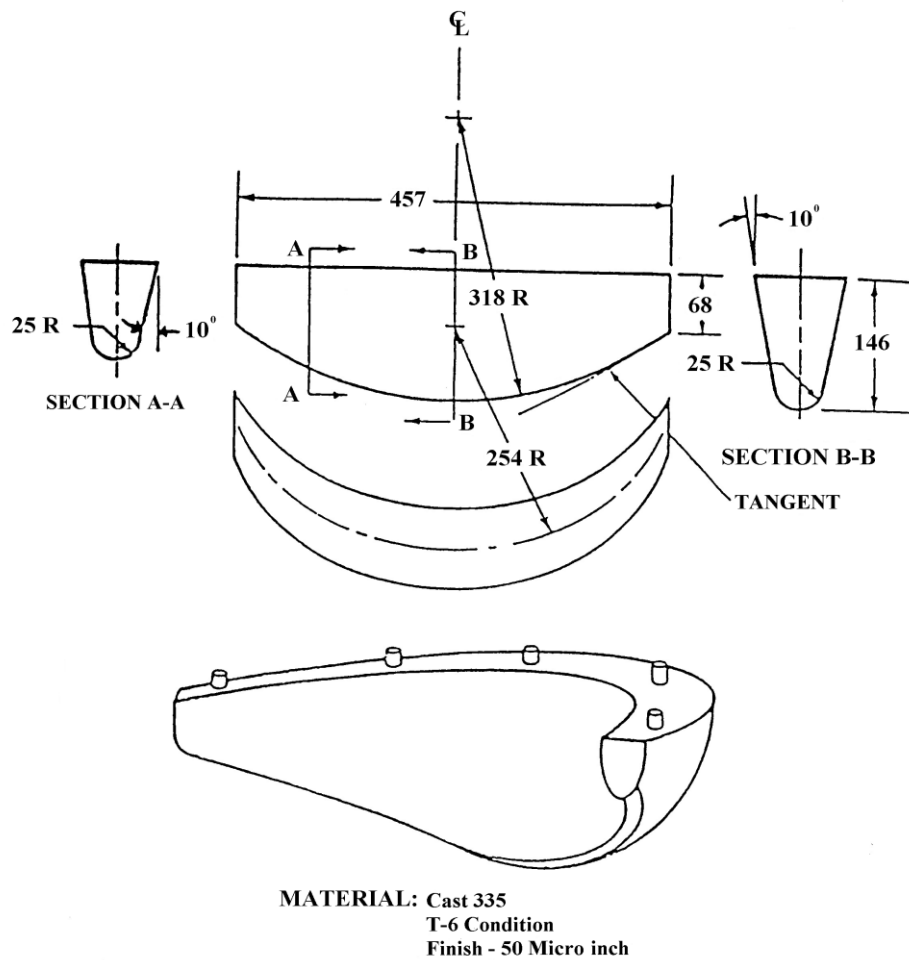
Diagram of bead unseating block (Dimensions in mm)
